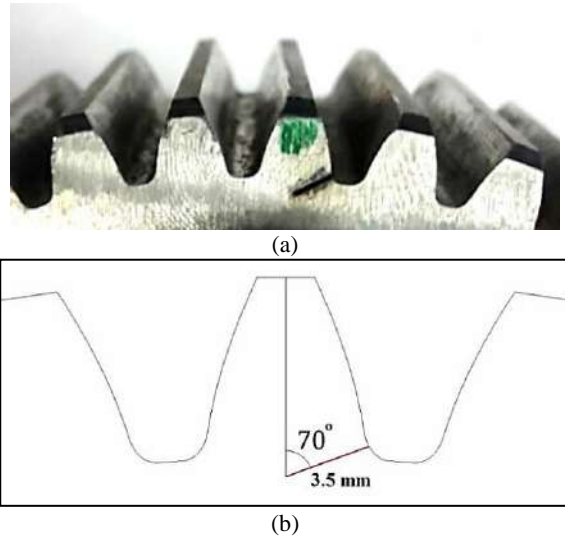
Cracked gear (a) using wire cut (b) dimensions of the crack
